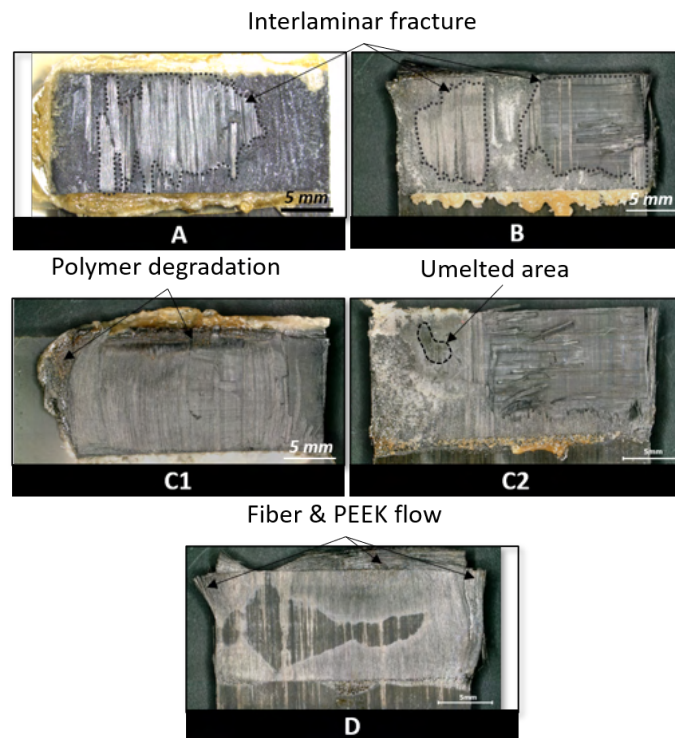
Interfacial fracture of welded specimens for all welding configurations (A, B, C1, C2 and D), for a welding time of 1000 *ms* and a welding load of 500 *N
